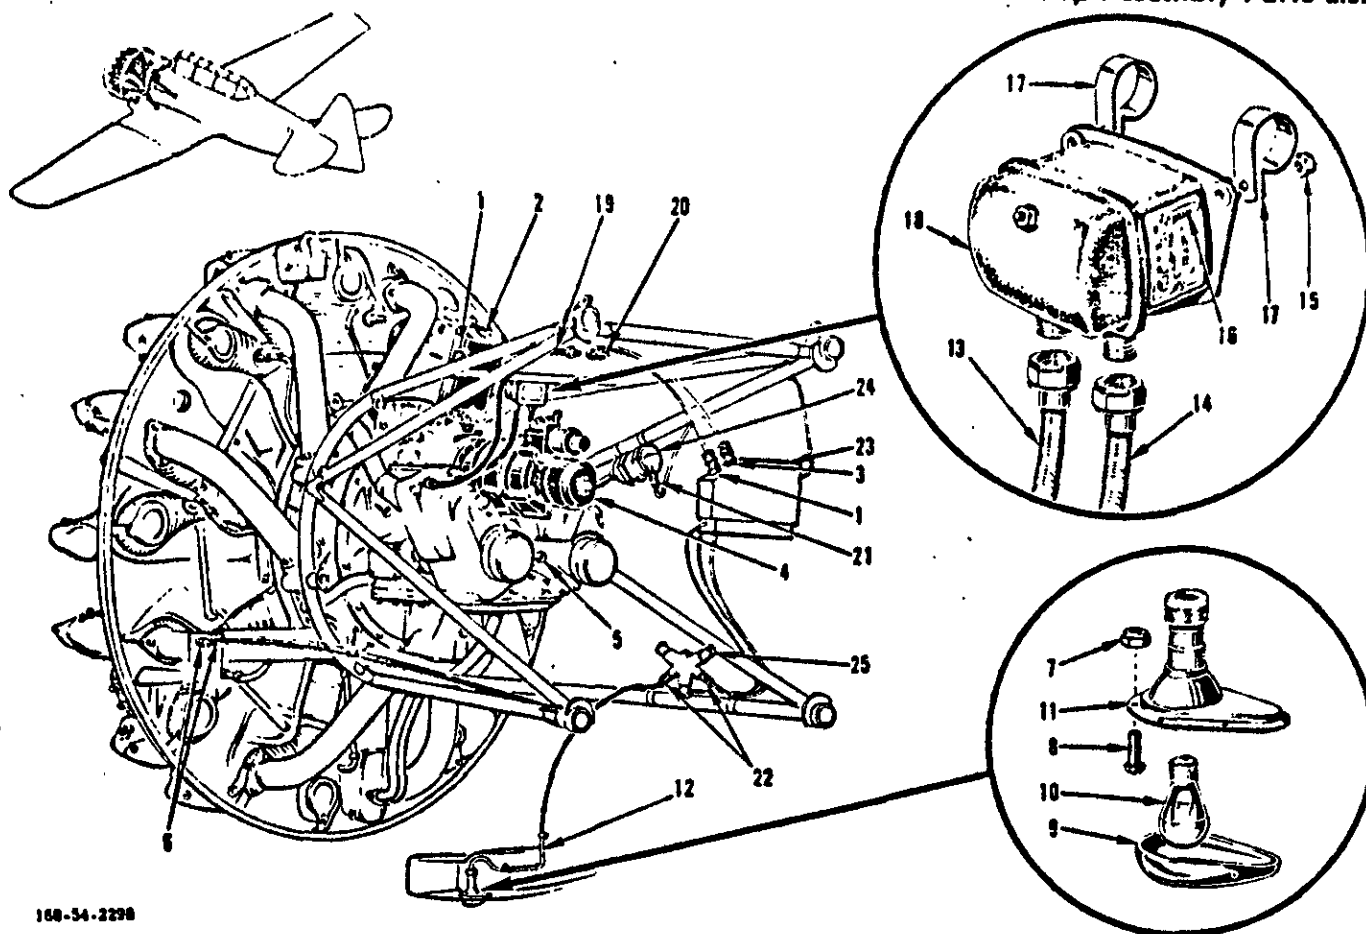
FUEL COCK CONTROL AND ATTACHING PARTS
